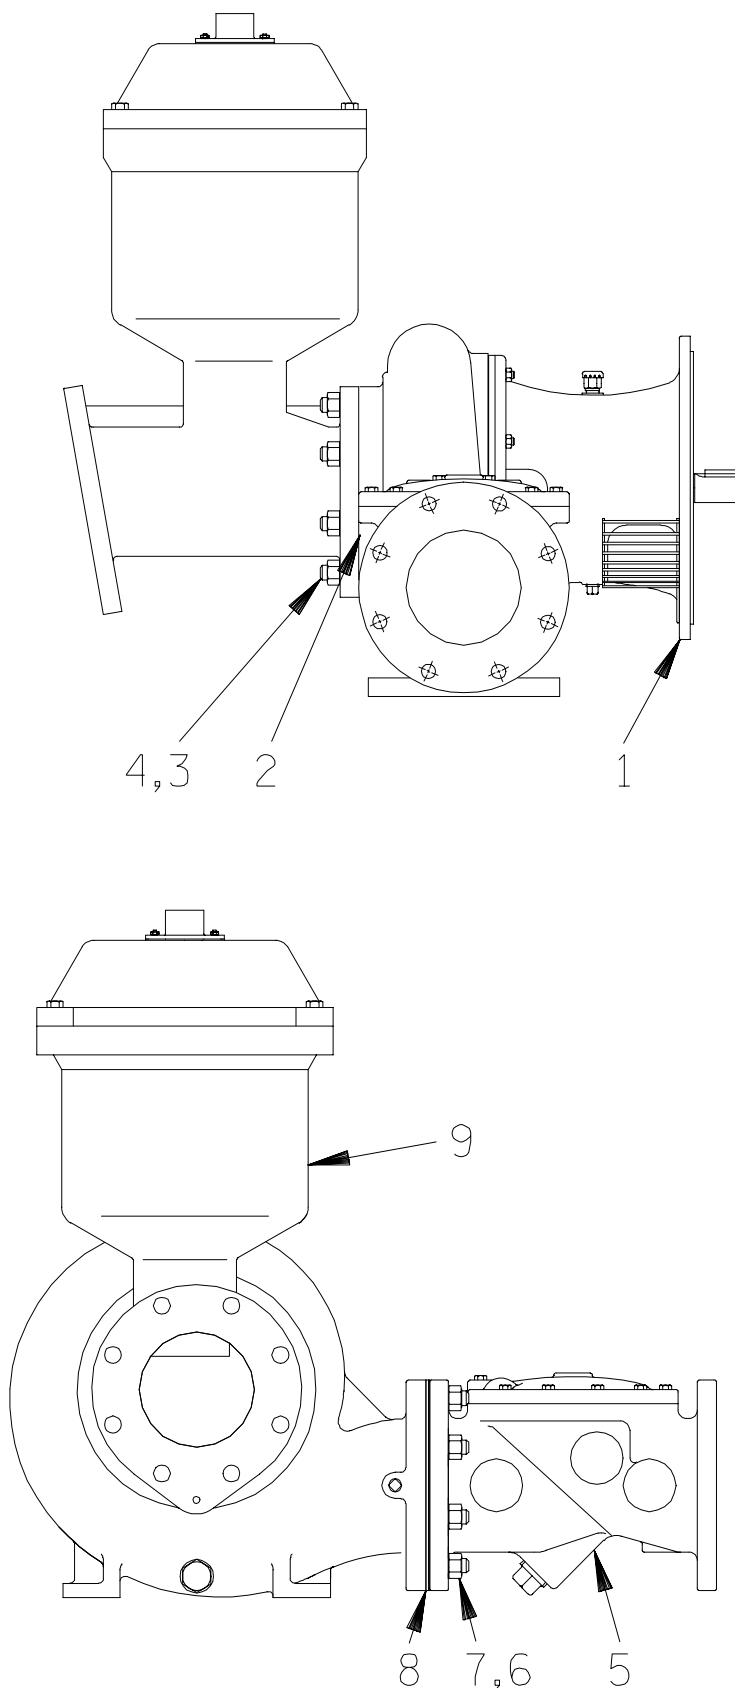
PA6A60-(SAE4/10) Pump Assembly
